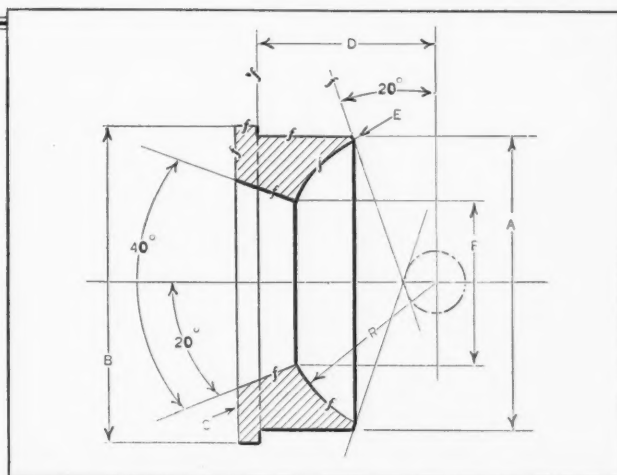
Ball Seat Machined with the Tooling Equipment Shown in Figs. 2 to 4
